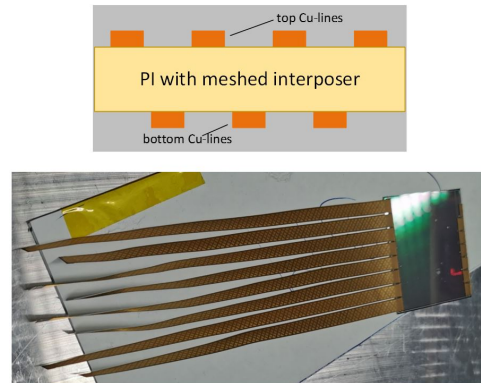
Top: Sketch of asymmetric cable layout; bottom: twisted cables after soldering on the STS-XYter chips and sensor.
